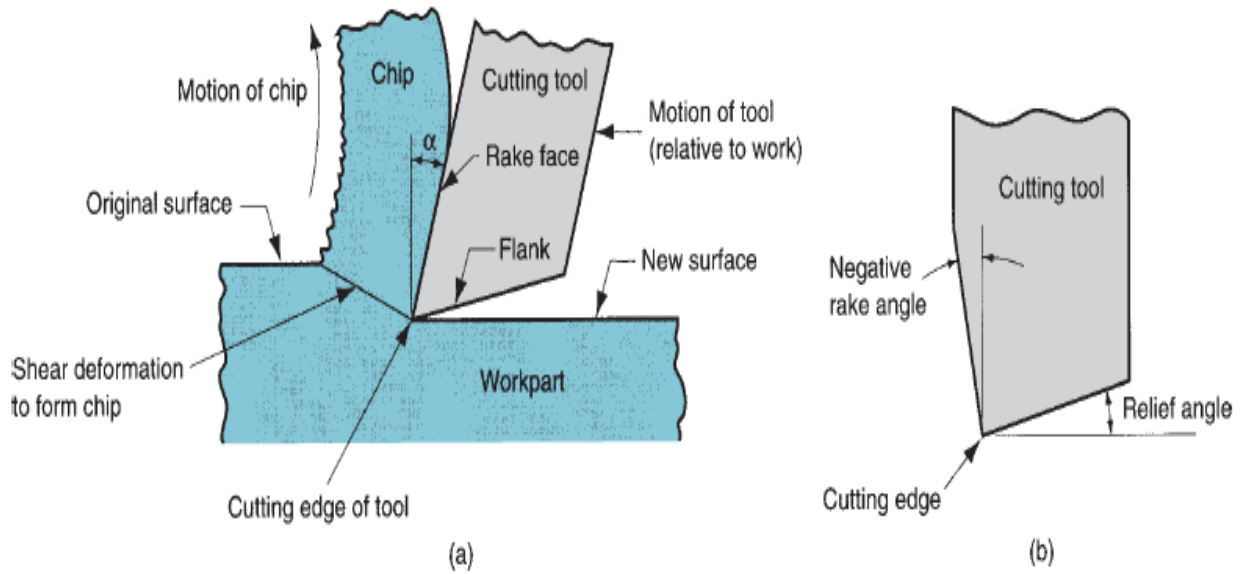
Metal machining (a) A cross-sectional view of the cutting process. (b) Negative rake angle of the tool, compare to positive rake angle in (a). (Groover, 2010)
